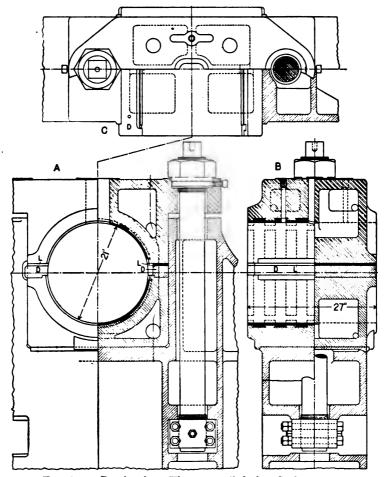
Bearing from Fig. 232, 21" shaft. Scale 1 to 20.
